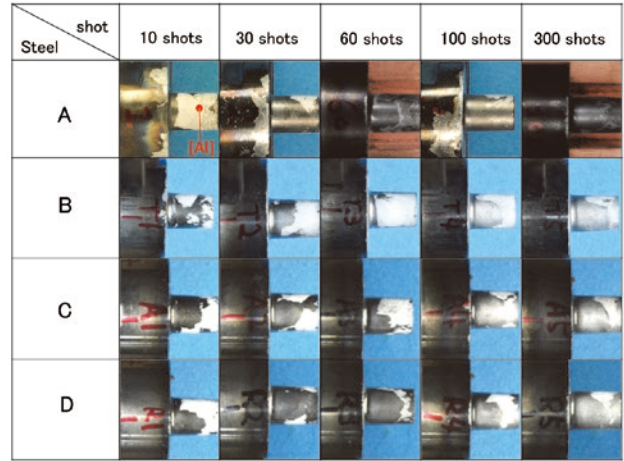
Outside of test pieces after Al melting test (Sprue side).
